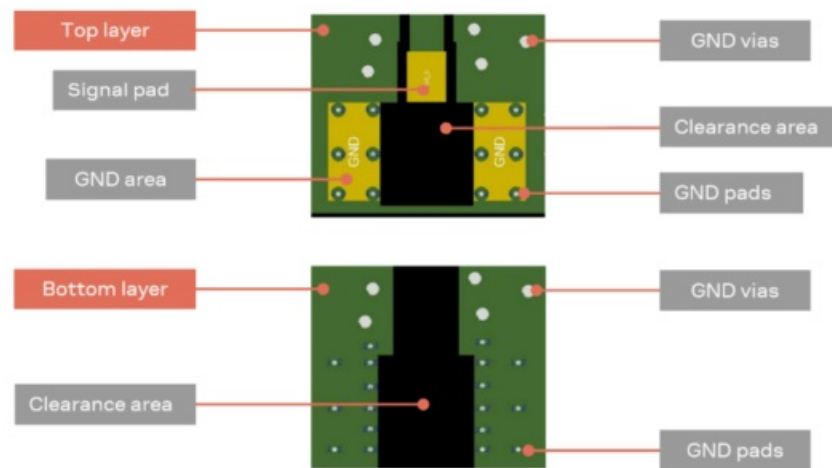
U.FL connector layout, top layer (left), and inner layer 1 (right)
